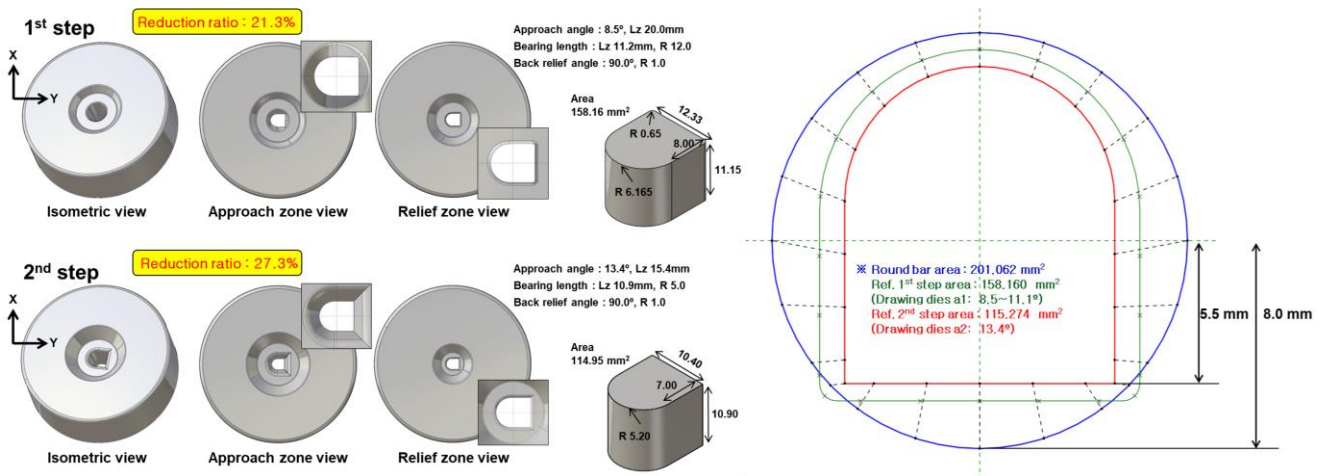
(Left) Die geometry of present cold-drawing process, (Right) Cross-sectional shape for each process
